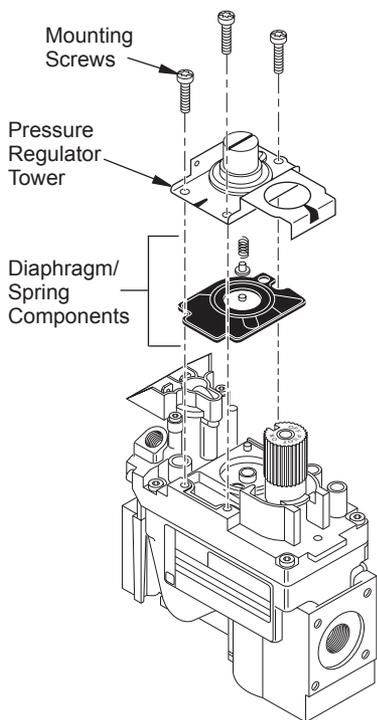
Removing Mounting Screws, Pressure Regulator Tower and Diaphragm/Spring Components
